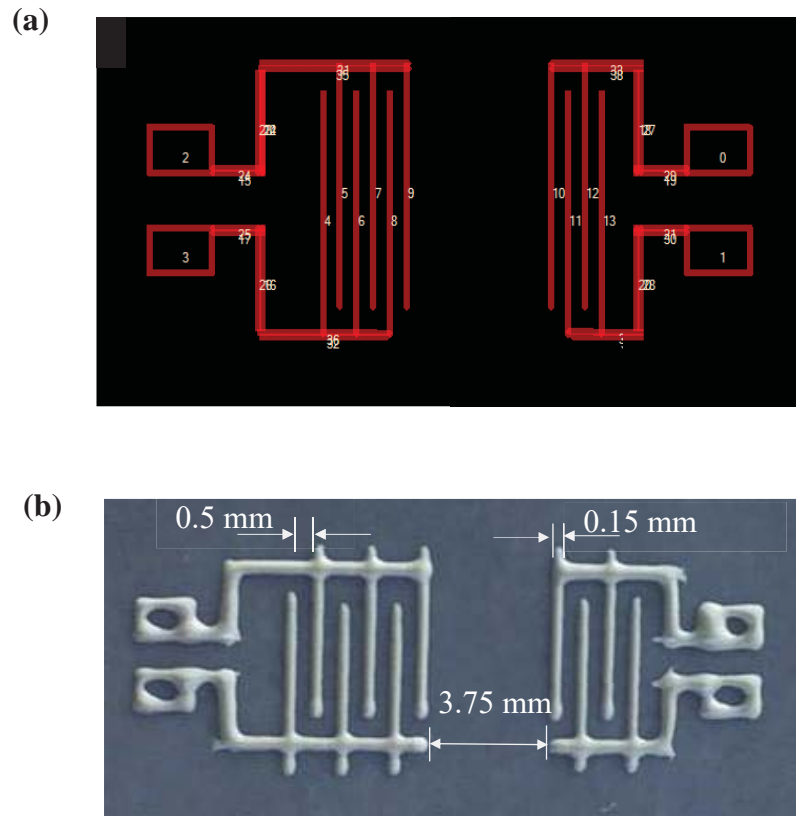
Design of IDT (a) CAD model and (b) Printed IDT with dimensions.
